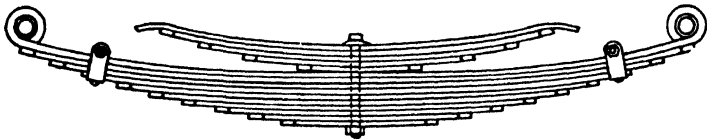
TRUCK SPRING WITH HELPER SPRING.
